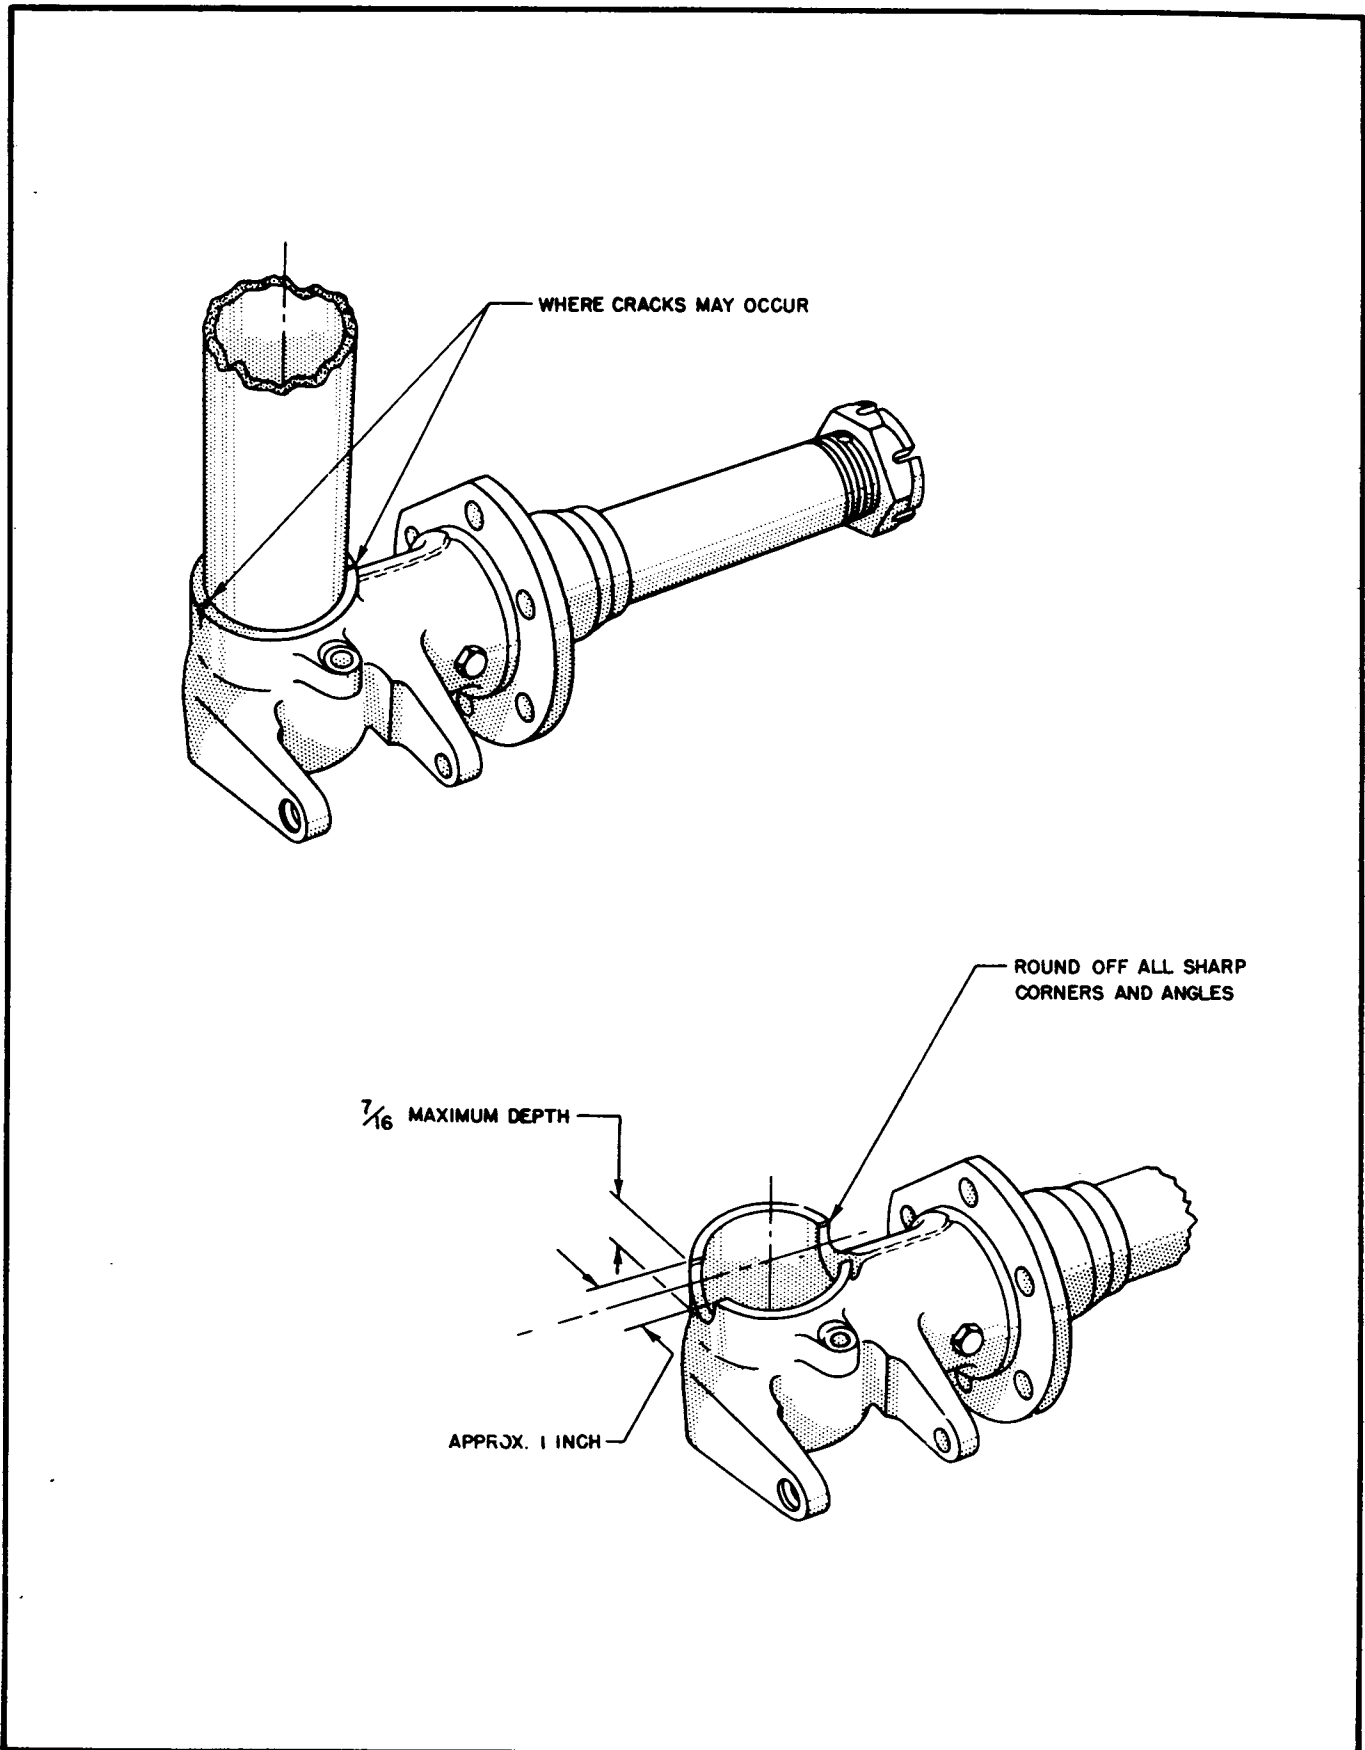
MAIN LANDING GEAR AXLE HOUSING REPAIR
